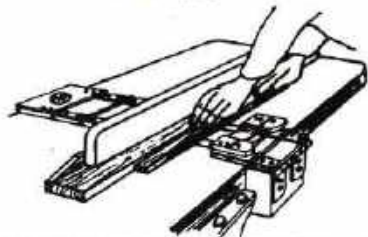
PLANING A NARROW PIECE WITH AN EXTENSION BOARD
